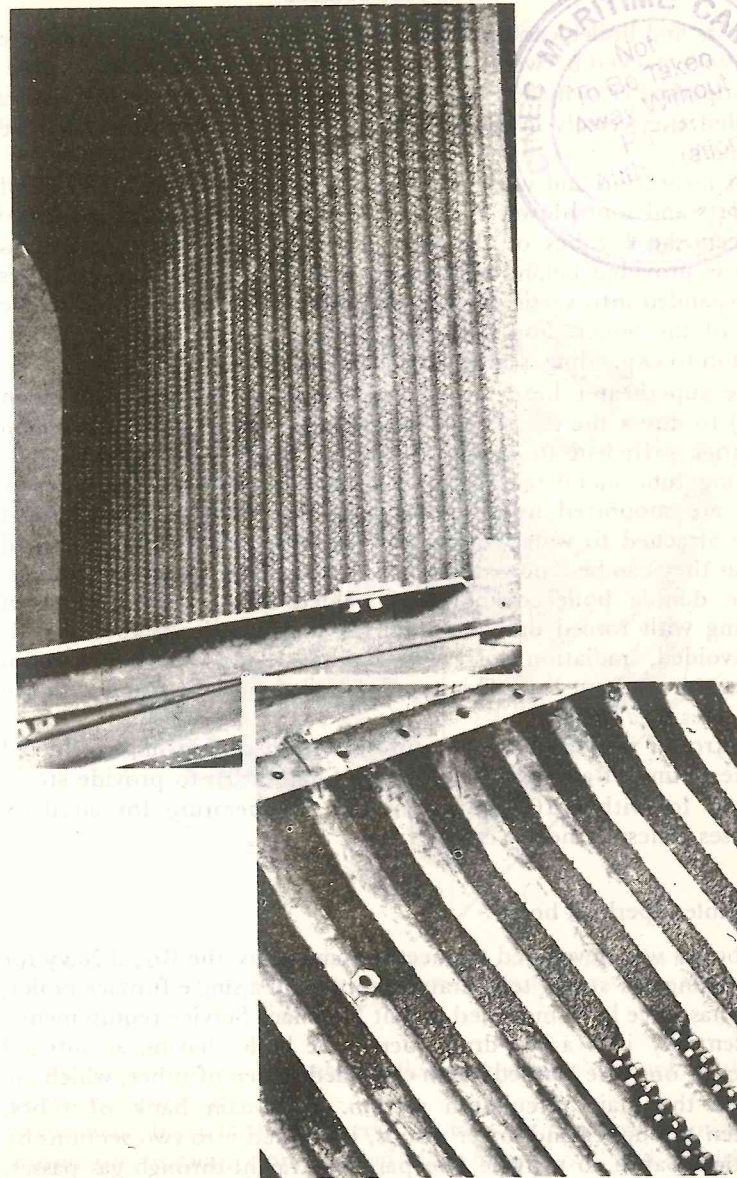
Babcock stud walls for use with selectable and integral furnace-type boilers (Left) Furnace view of side wall and roof showing full studding in chrome ore to reduce heat absorption at the front end. Partial studding to receive radiant heat at the rear end. (Right) The outside of the water-cooled wall with plastic chrome ore partly applied to studded tubes. The nut welded to one of the tubes is used for securing the outer insulation.
